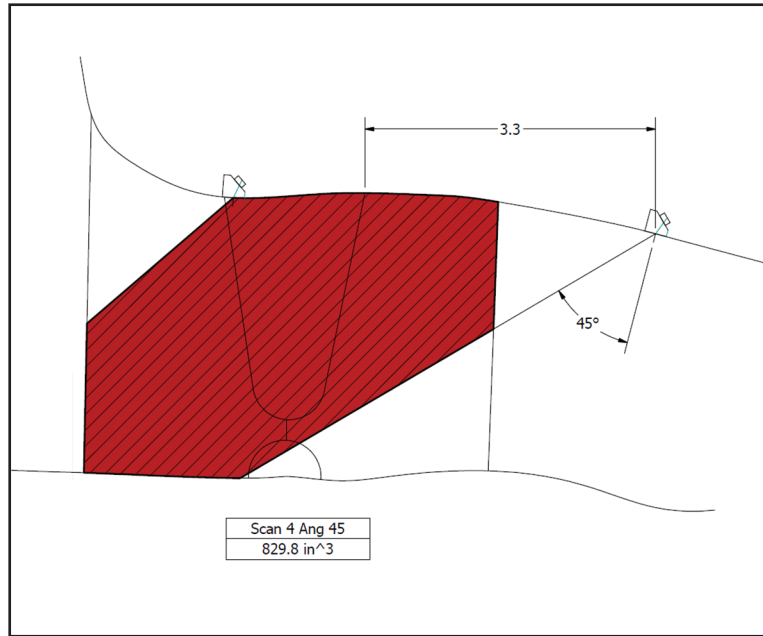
Weld RCW-21, 45° Head Side Axial Scans
